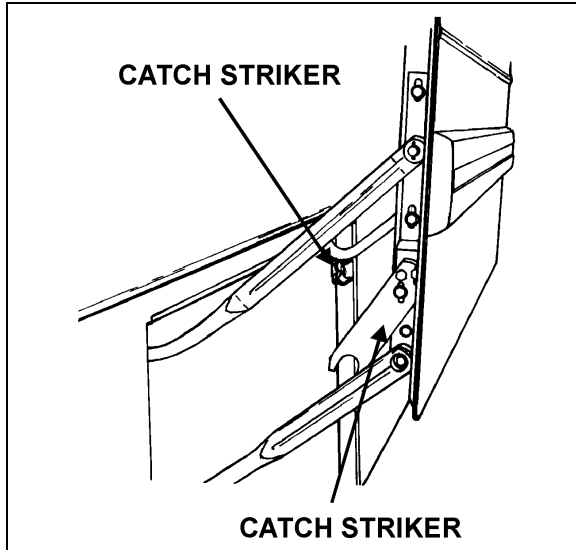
BAGGAGE DOOR CATCH STRIKER 18146
